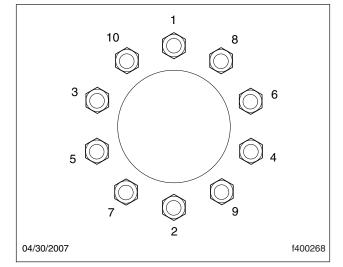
, 10-Hole Disc Wheel Tightening Sequence
